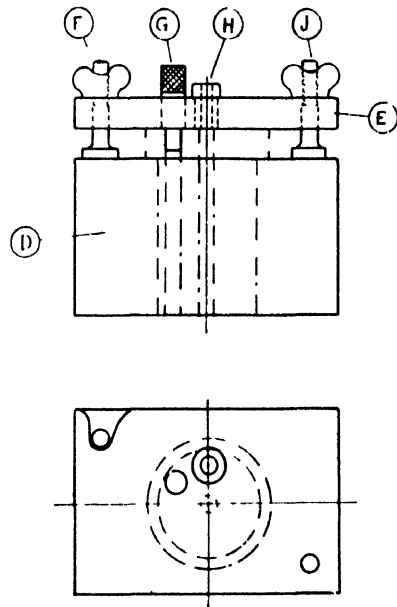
ELEVATION AND PLAN OF BOX DRILLING JIG
